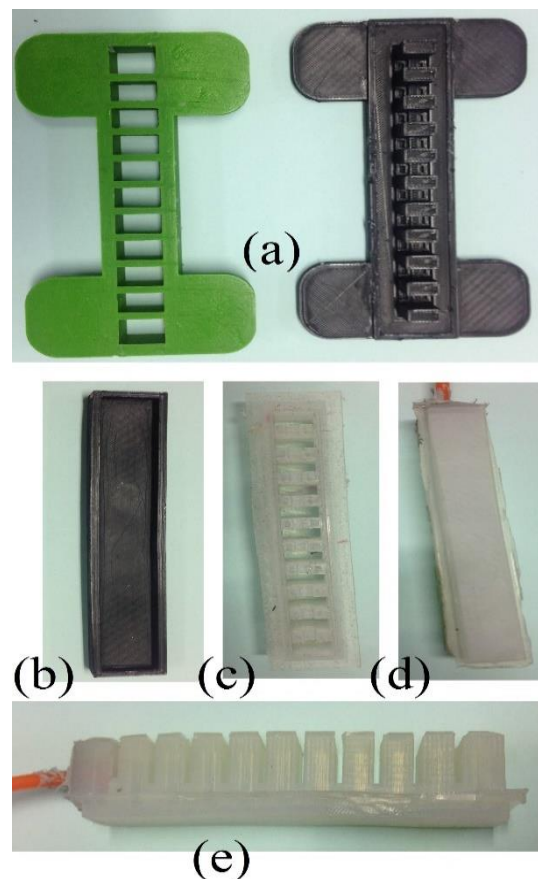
Fabrication process of pneumatic actuator: (a) 3D printed upper and lower molds, (b) Base mold, (c) Fabricated air chamber part, (d, e) Enclosed
